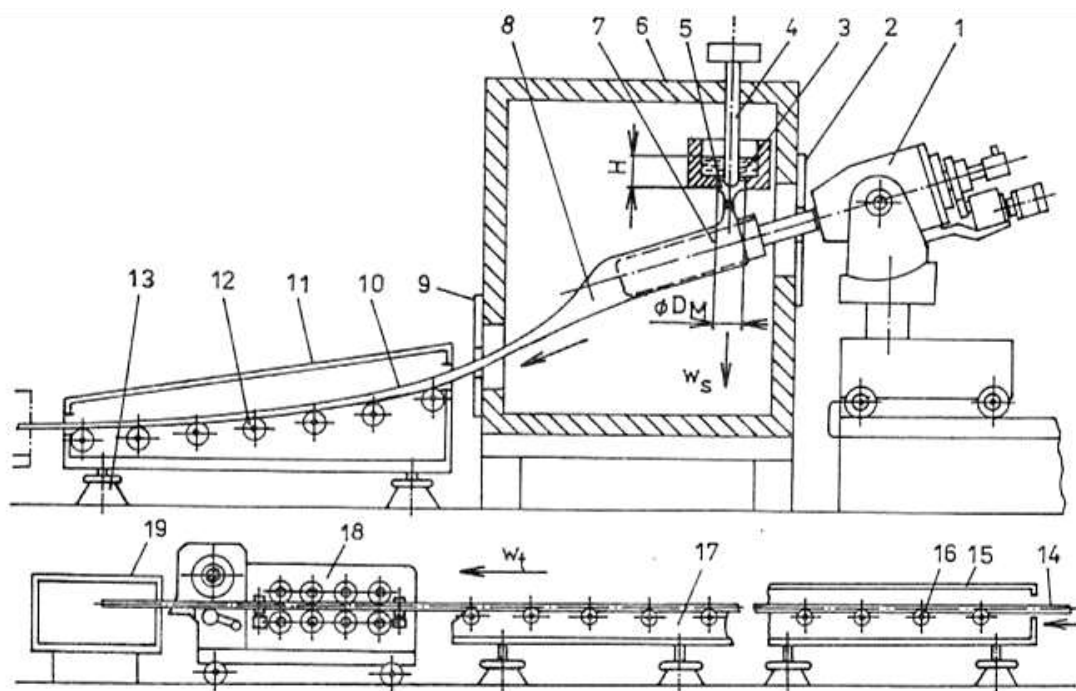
Machinery for horizontal tube drawing: 1 - forming machine, 2 - insulating barrier, 3 - forehearth with spout, 4 - stop, 5 - strip of outflowing glass melt, 6 - chamber, 7 - nose with glass-blowing pipe, 8 - tube nucleus, 9 - insulating barrier, 10 - tube, 11 - covered part of the runway, 12 - roller, 13 - height locking washer, 14 - tube, 15 and 17 - covered and open carrying roll, 16 - roller, 18 - drawing machine, 19 - pallet
